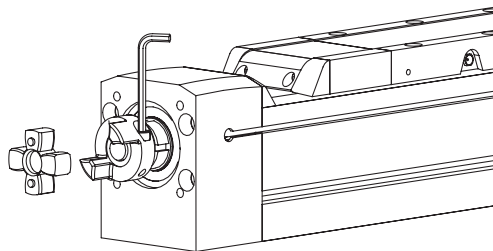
Tightening the clamping hub and depressing the elastomer insert
